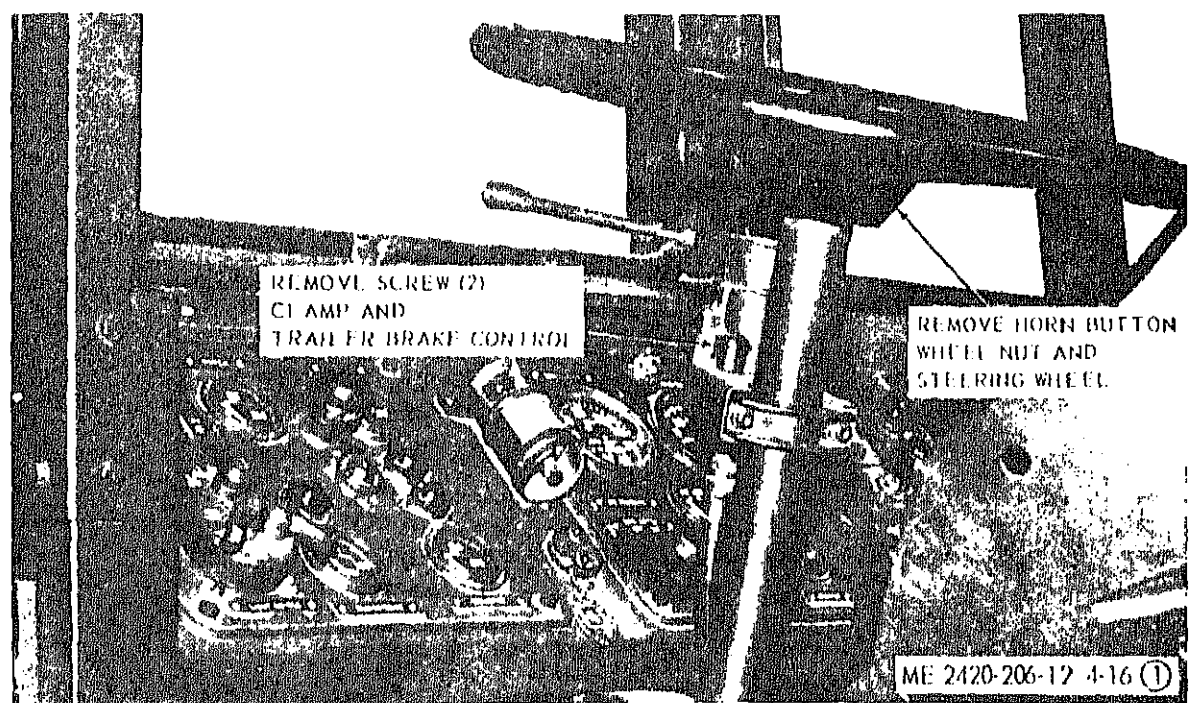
Steering wheel, trailer brake control, removal and installation. (sheet 1 of 2).
